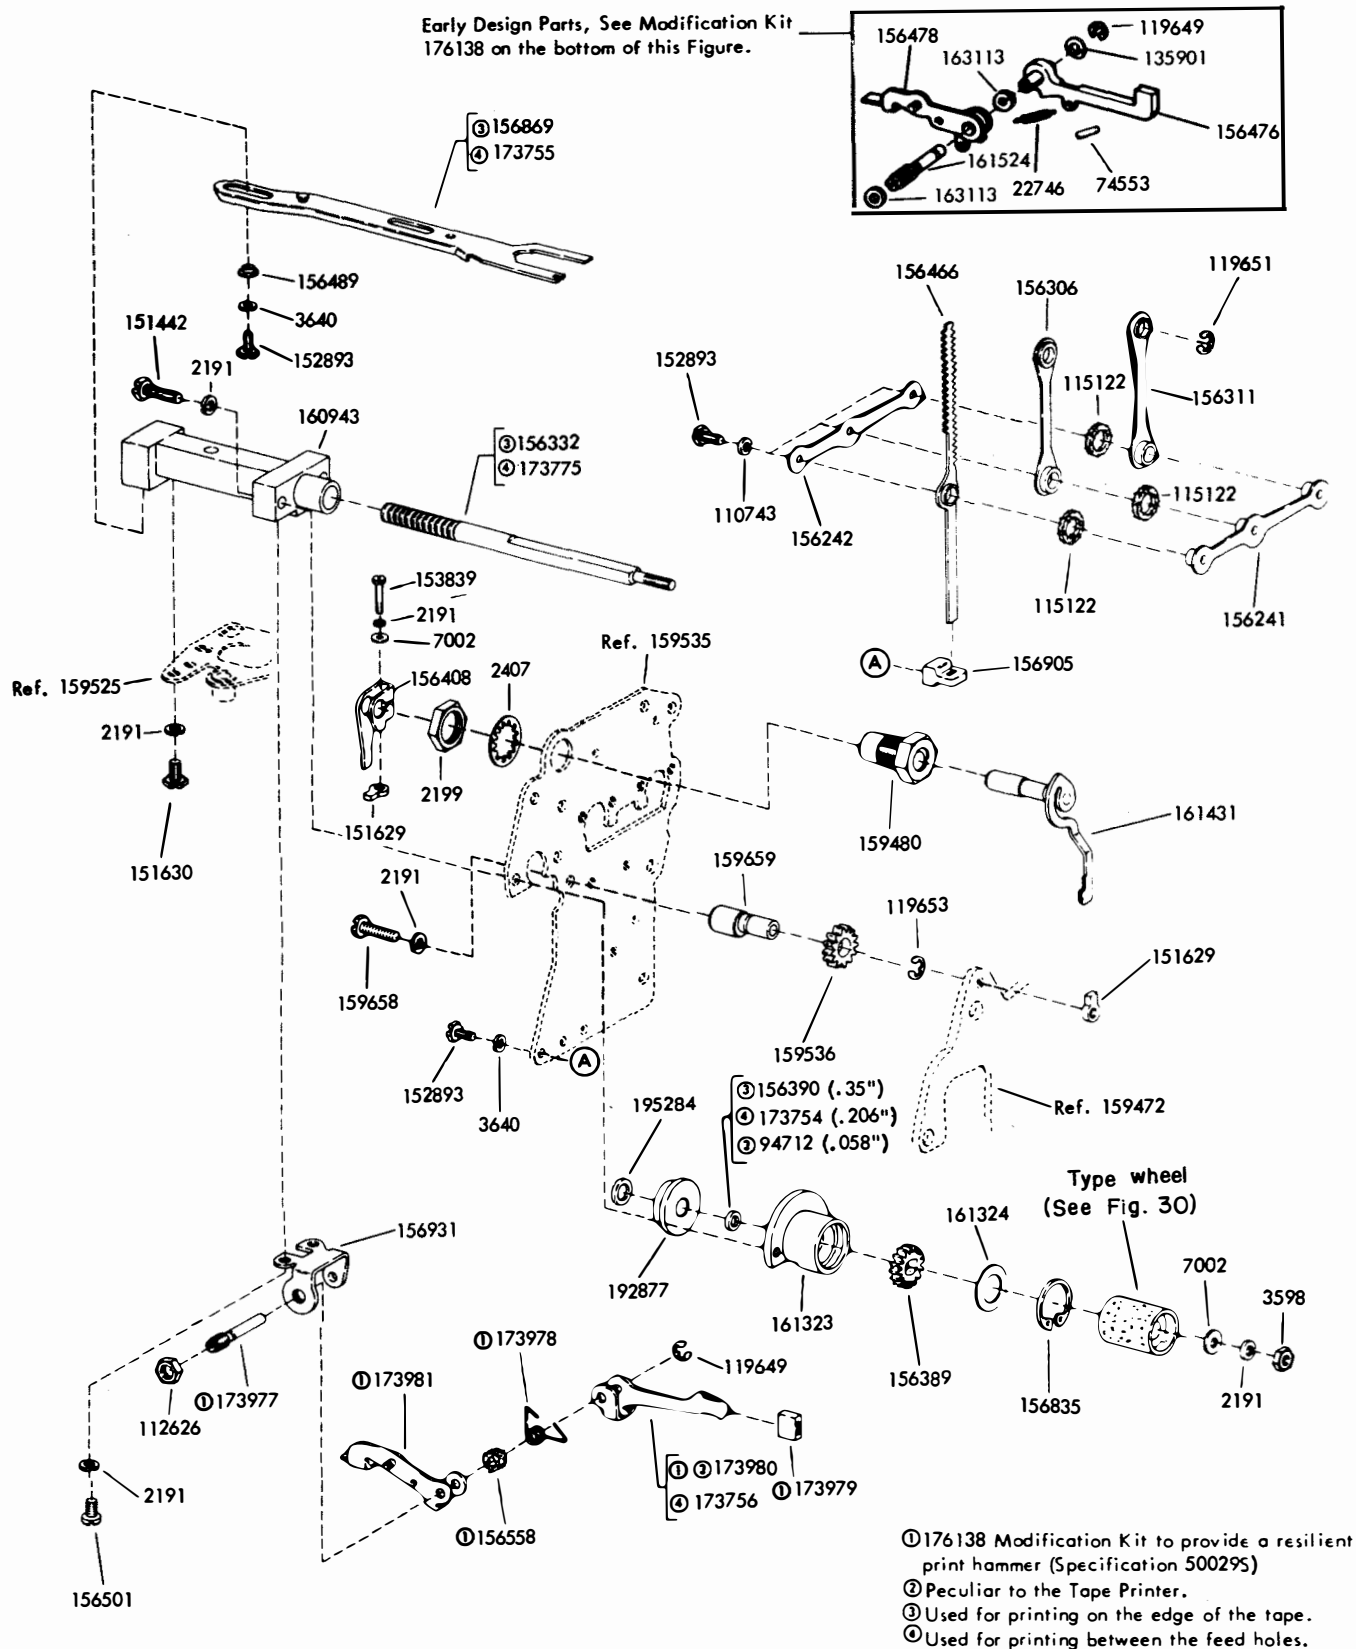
Rotary Positioning Mechanism (Sheet 2 of 2)
